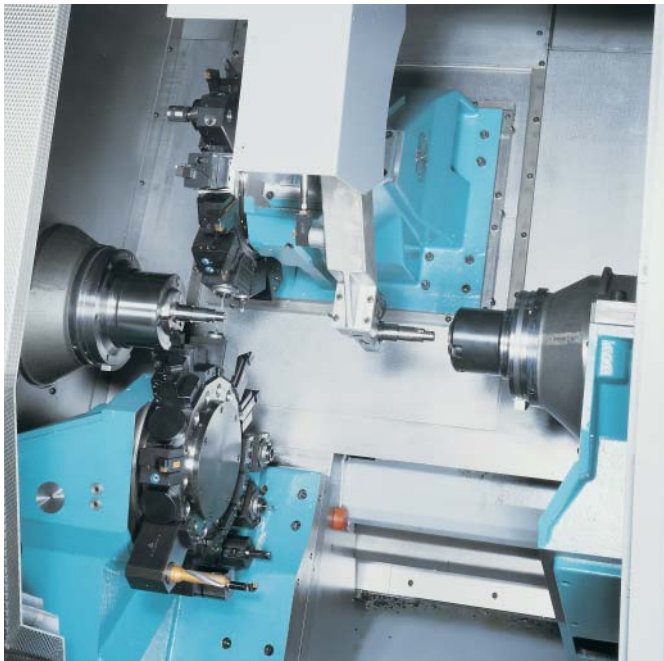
The center allows flexible complete machining at short chip-to-chip times
